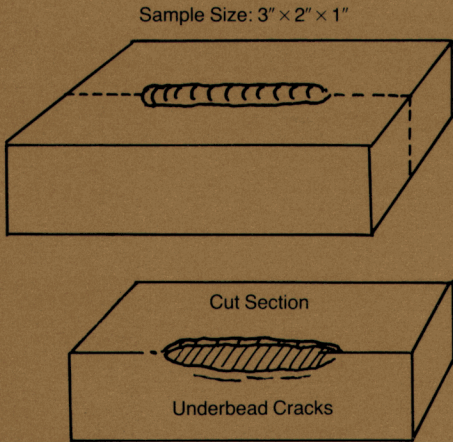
BATELLE UNDERBEAD CRACKING TEST
